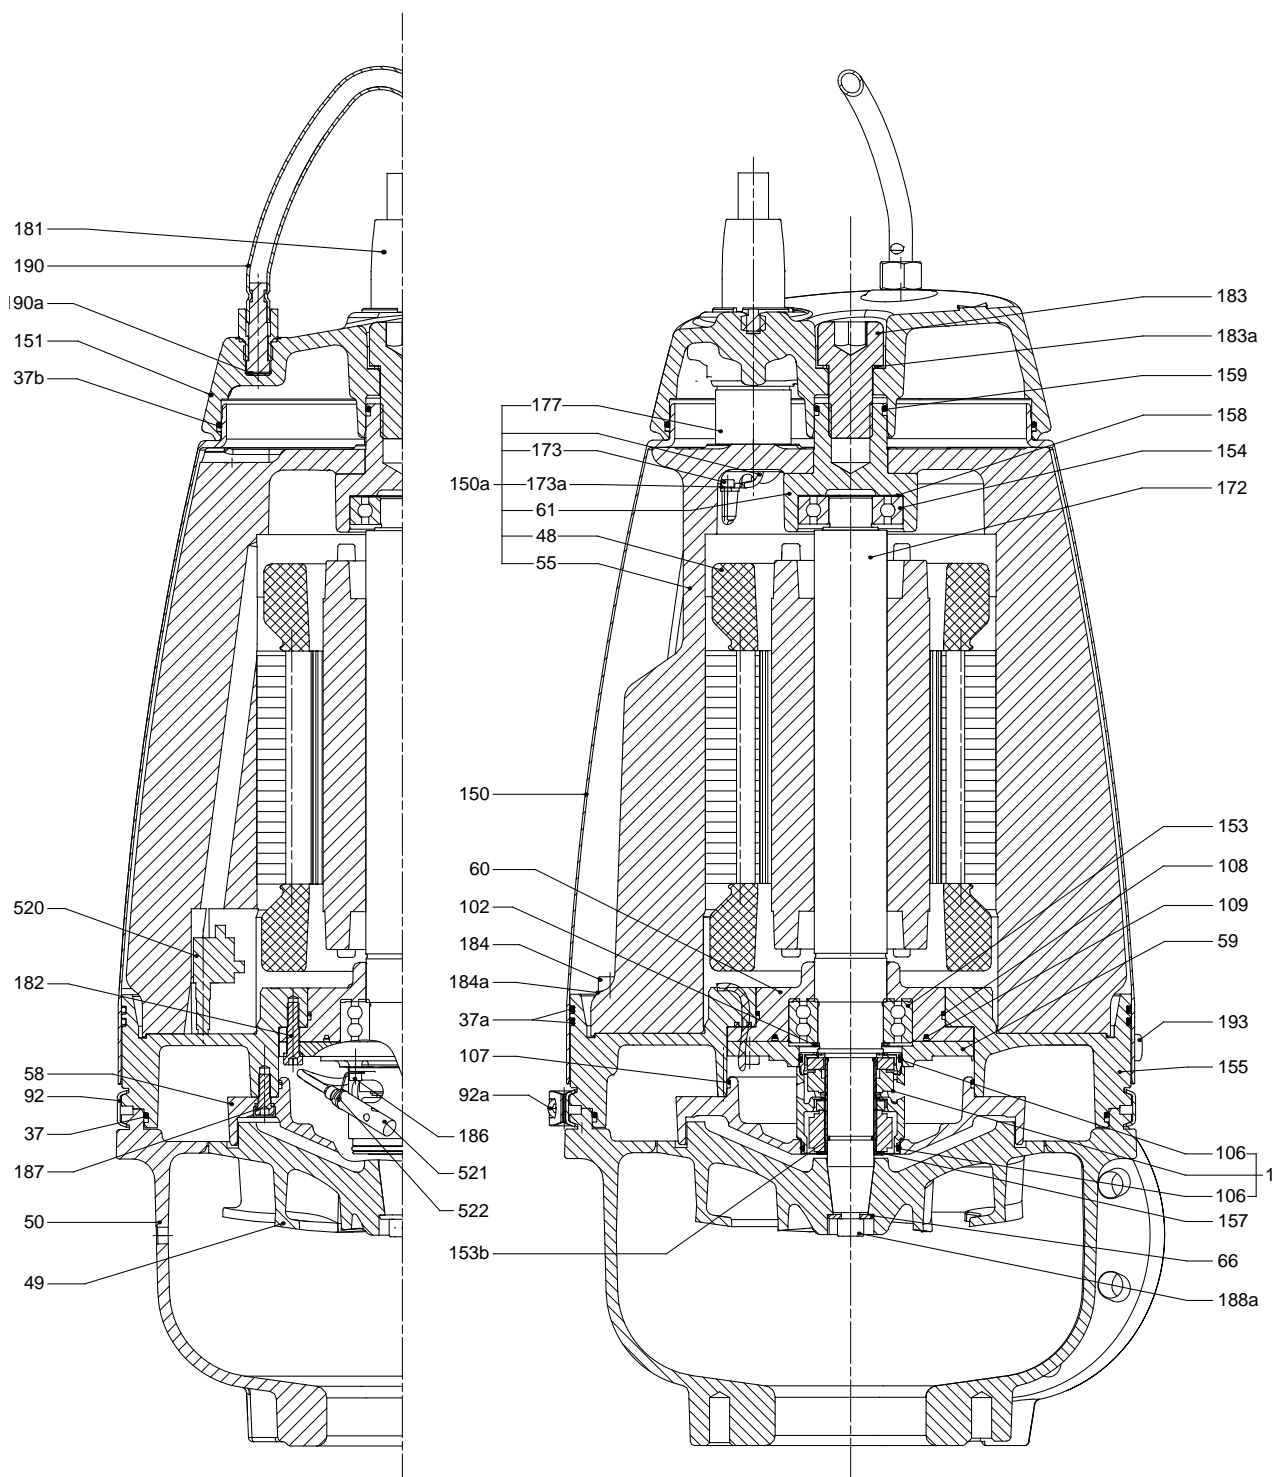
Sectional drawing, SEV pump with SuperVortex impeller, sensor version
